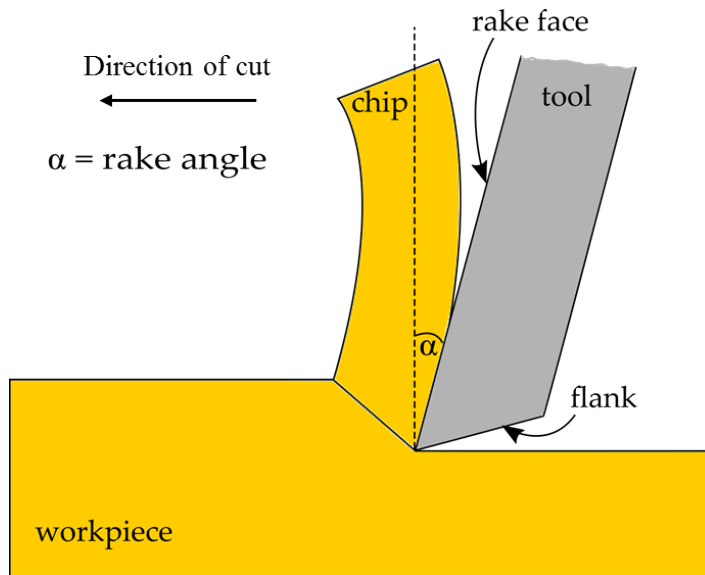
Schematic of the tool showing rake face and flank, as well as rake angle.
